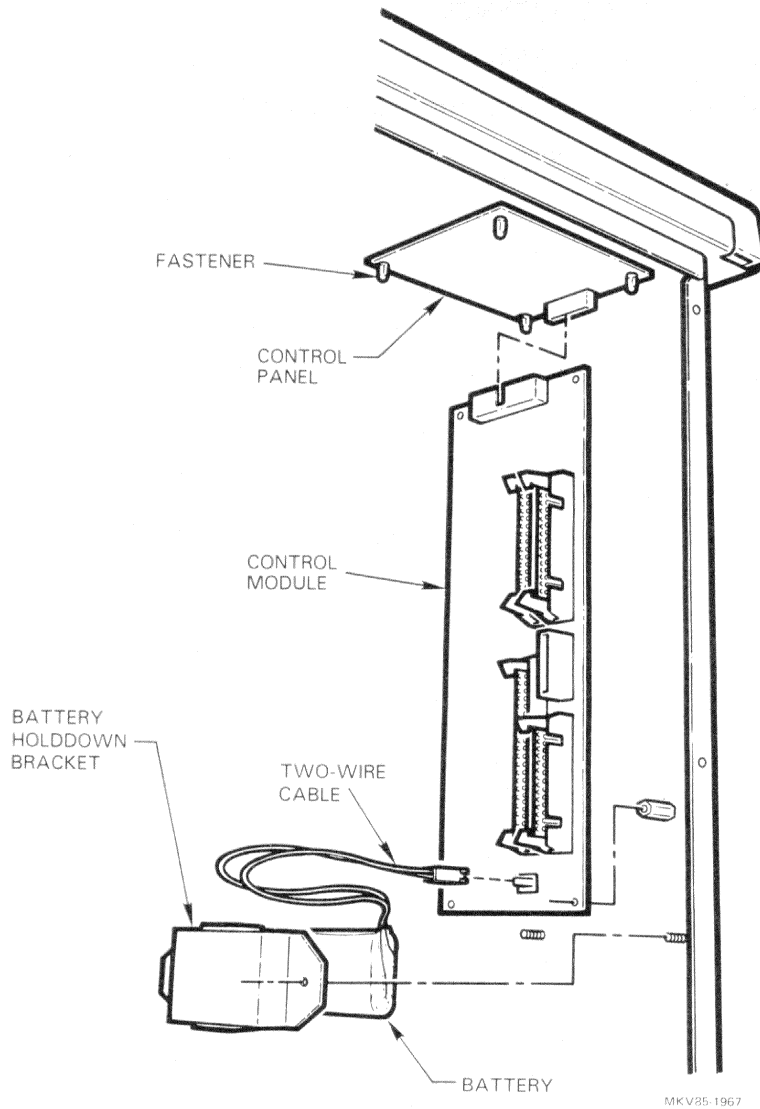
KK810 Battery and Control Module Removal/Replacement
